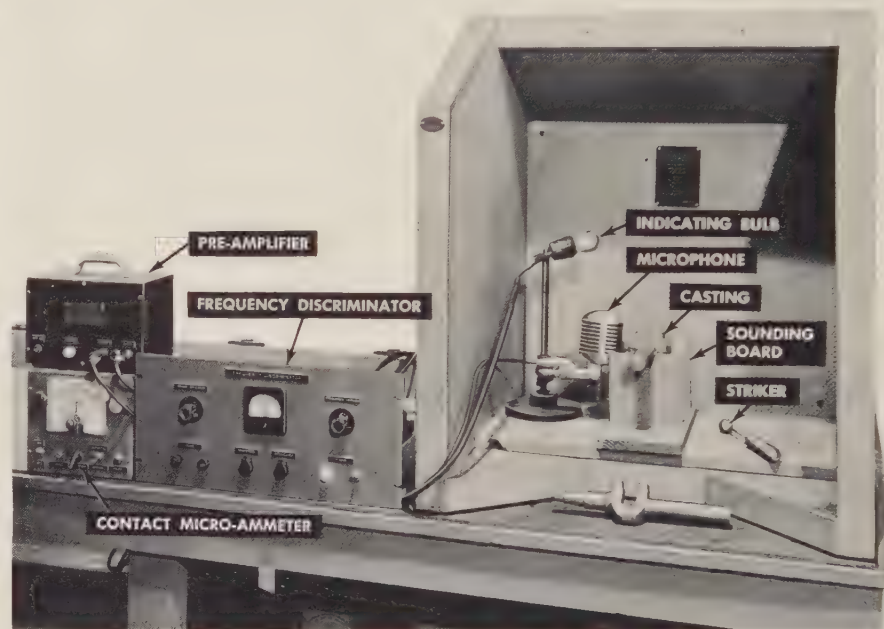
A manually operated temporary set-up was used to sonically inspect small size crankshafts. The casting, placed in a sound-proof booth, was set into mechanical vibration by the rod-mounted steel ball. A microphone sent the vibration frequency to the electrical instrumentation shown at the left of the booth. This instrumentation consisted of a frequency discriminator, a pre-amplifier, and a contact micro-ammeter. If the casting was defective, the bulb, located inside the booth, would not light. This temporary set-up was capable of sonically inspecting about 500 castings per hour.
